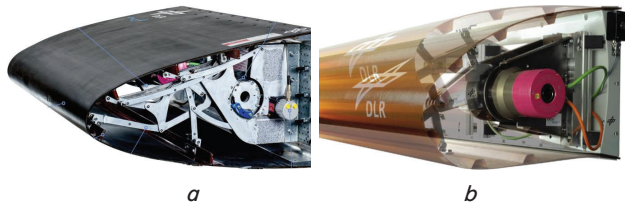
Examples of the adaptive front-end with a drive [27]: *a* – kinematic mechanism; *b* – drive
